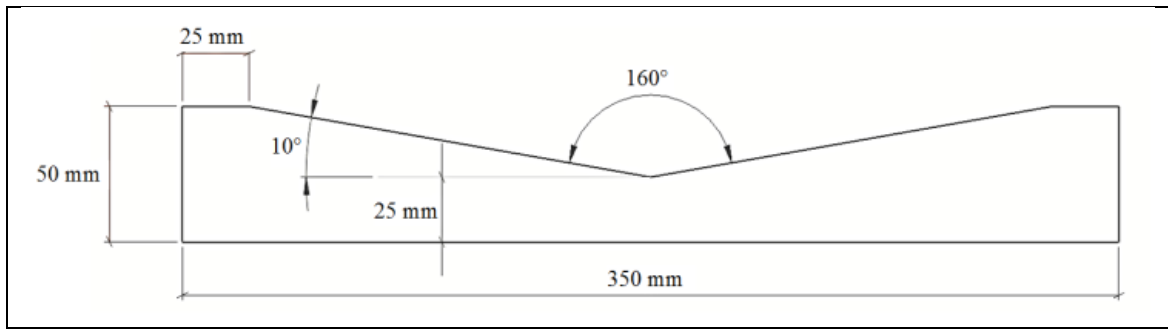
10° Wedge shaped indenter: drawing with dimensions (side view).
